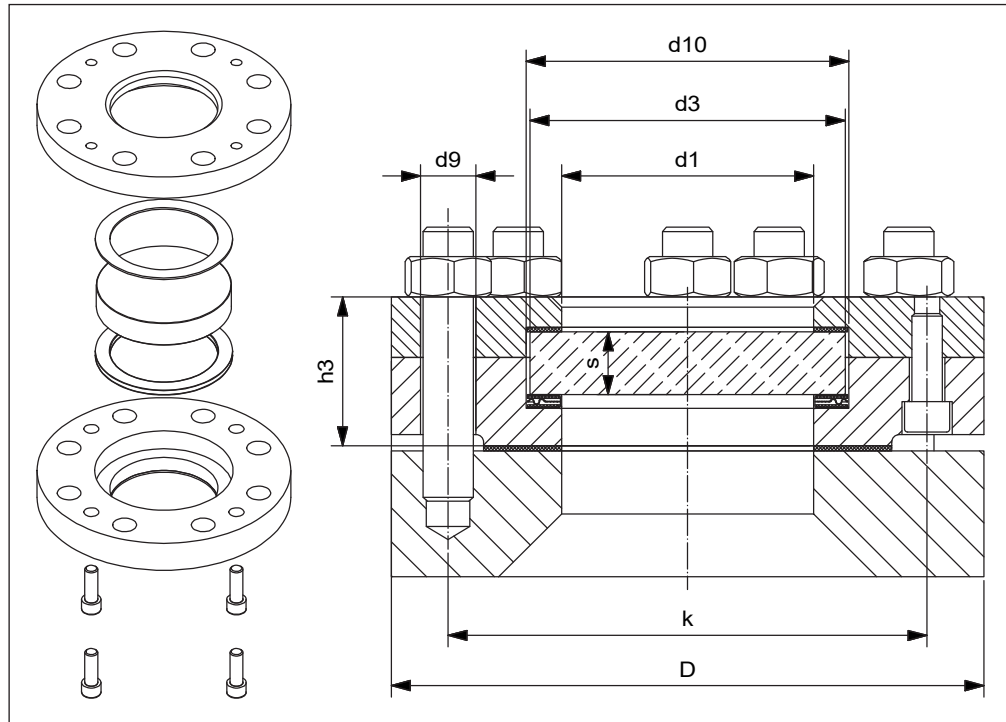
Dimensions of sight glass fitting for bolting on for processes up to 2.5 MPa
